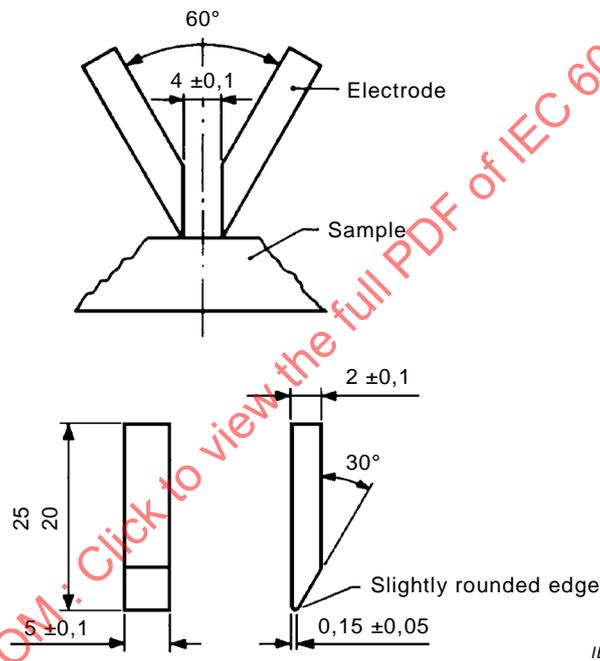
Arrangements and dimensions of the electrodes for the tracking test
